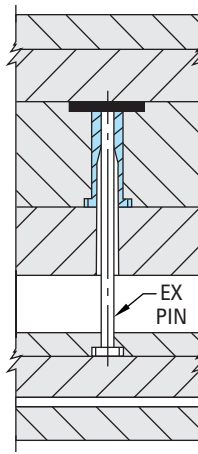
Figure A shows a typical Ejector Sleeve application for plastics molding or die casting where the sleeve is used to eject the piece part.
